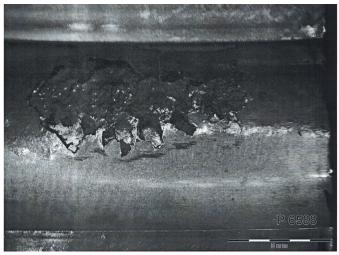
Macro-structure of material from outer raceway of Toyota Avensis bearing
